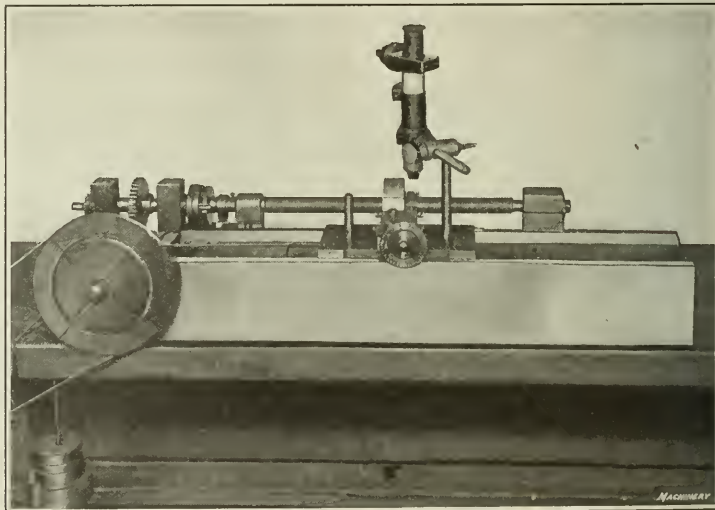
Screw Recutting Machine designed to operate on Principle shown diagrammatically in Fig. 4. Particular Attention is called to Bearings for supporting Screw to be recut, and Special Coupling between Work and Machine Spindle
